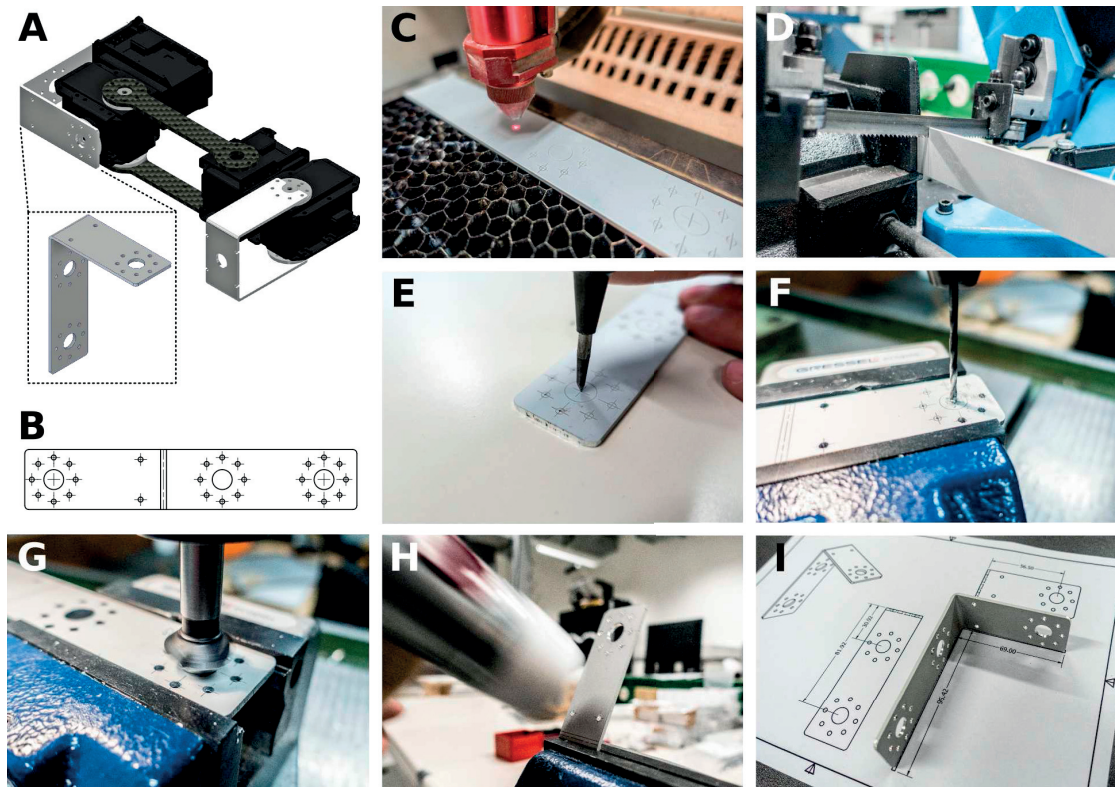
An example of producing an aluminum part of Krock robot. (A) The location of the part in Krock-2’s leg. (B) 2D technical drawing of the part. (C)-(H) Laser engraving, cutting, hole punching, drilling, cleaning and bending steps. (I) The produced part.
